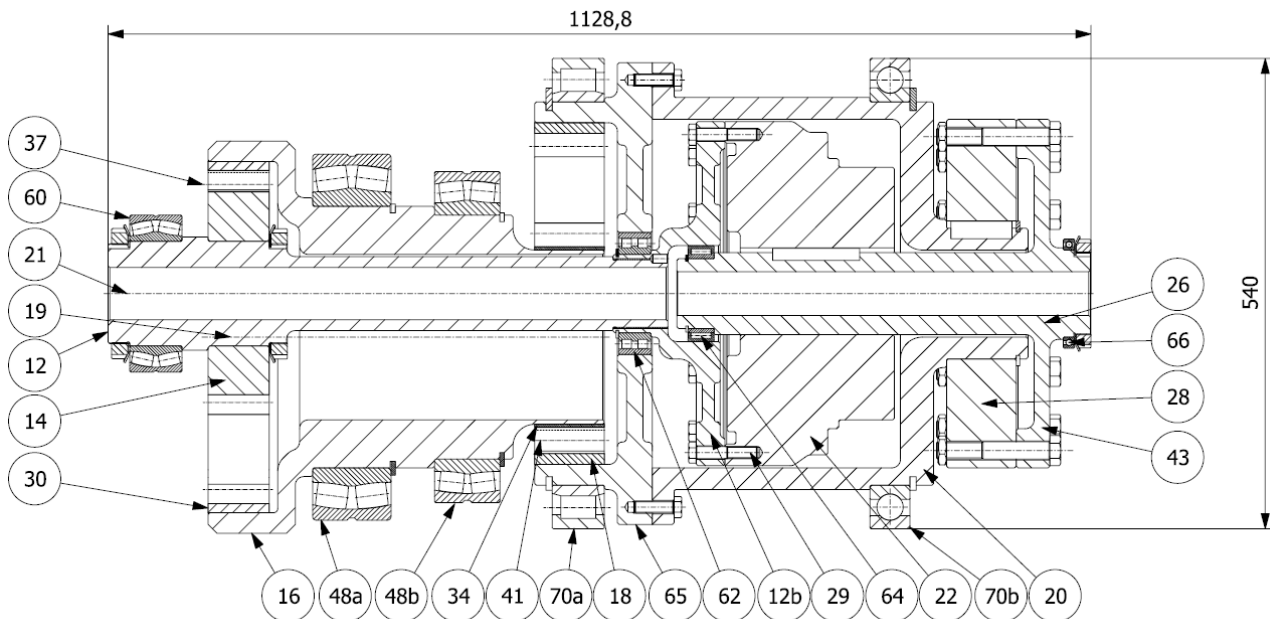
Siemens NX drawing of the designed NASA Offset Compound Gear
